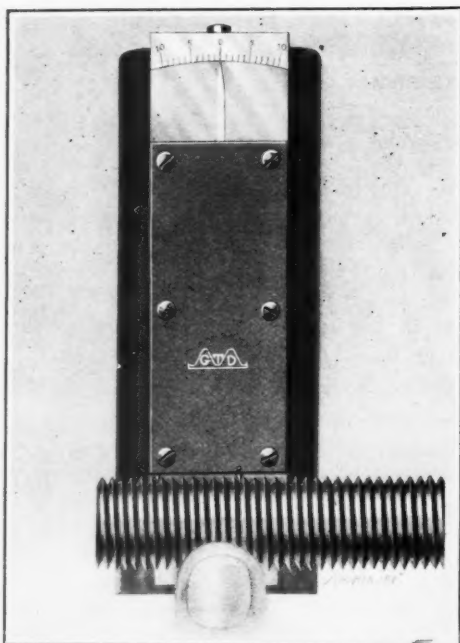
Indicator shown in Fig. 18 in Use testing Lead of Screw
